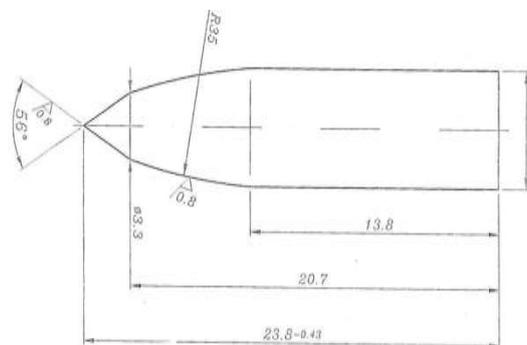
Geometrical dimensions of the bullet steel core used in the tests
